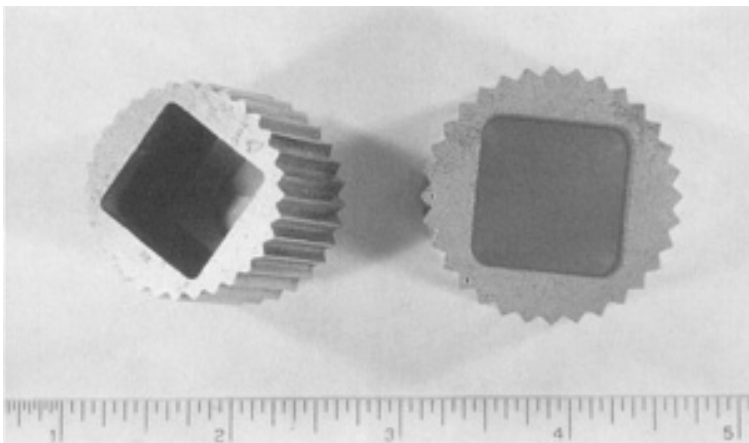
Actuator prototype after wire electric discharge machining from a sintered block. Courtesy of Airtech, Inc.
